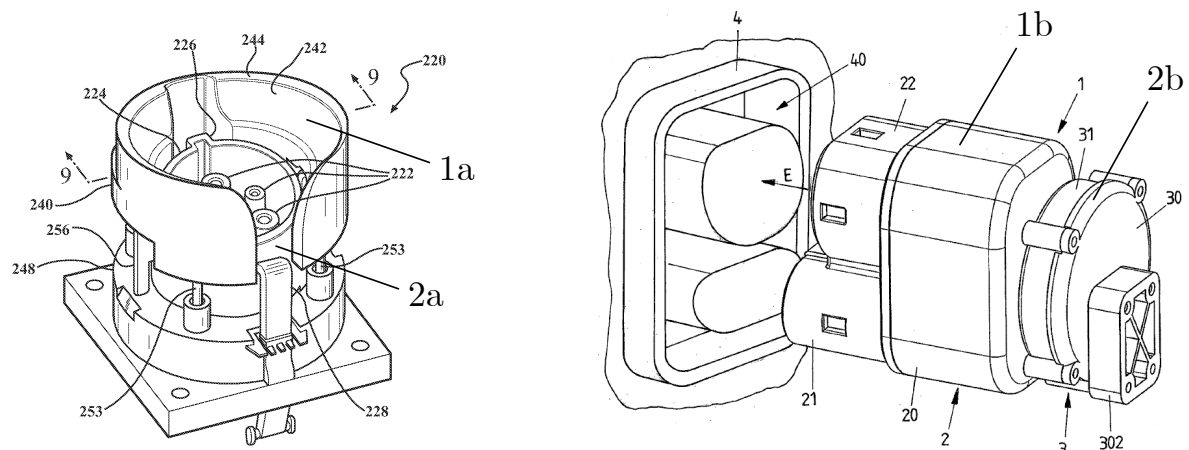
Left: Illustration of a patented coupling unit concept with a retractable guide from GM, [GMR⁺16]. Right: Patent drawing of a connector system with a misalignment compensation module, [CON16b].
